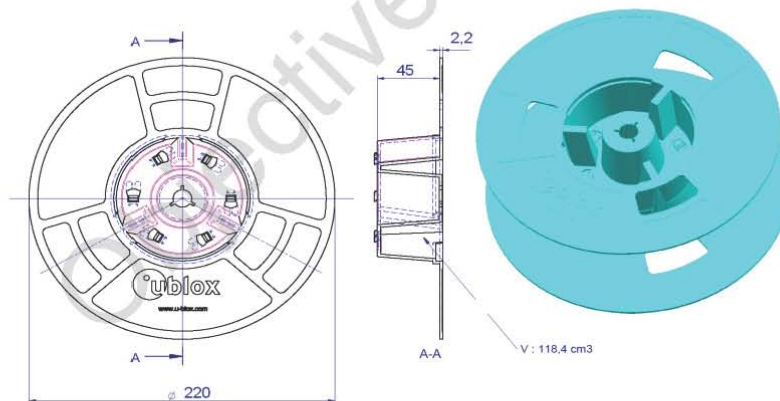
Dimension of reel for 250 pieces (dimensions unless otherwise specified in mm)
